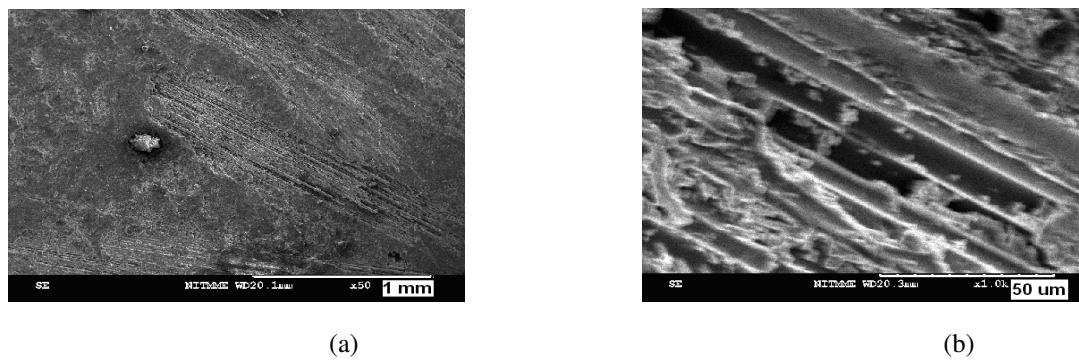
Machined surface of Hand Lay up pipes - poor surface finish (TCN 5)
